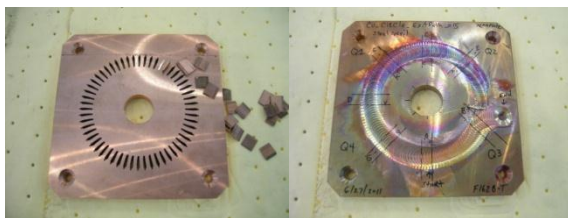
Cu plates with small Cu bar segments welded to simulate the rotor end cap configuration.
